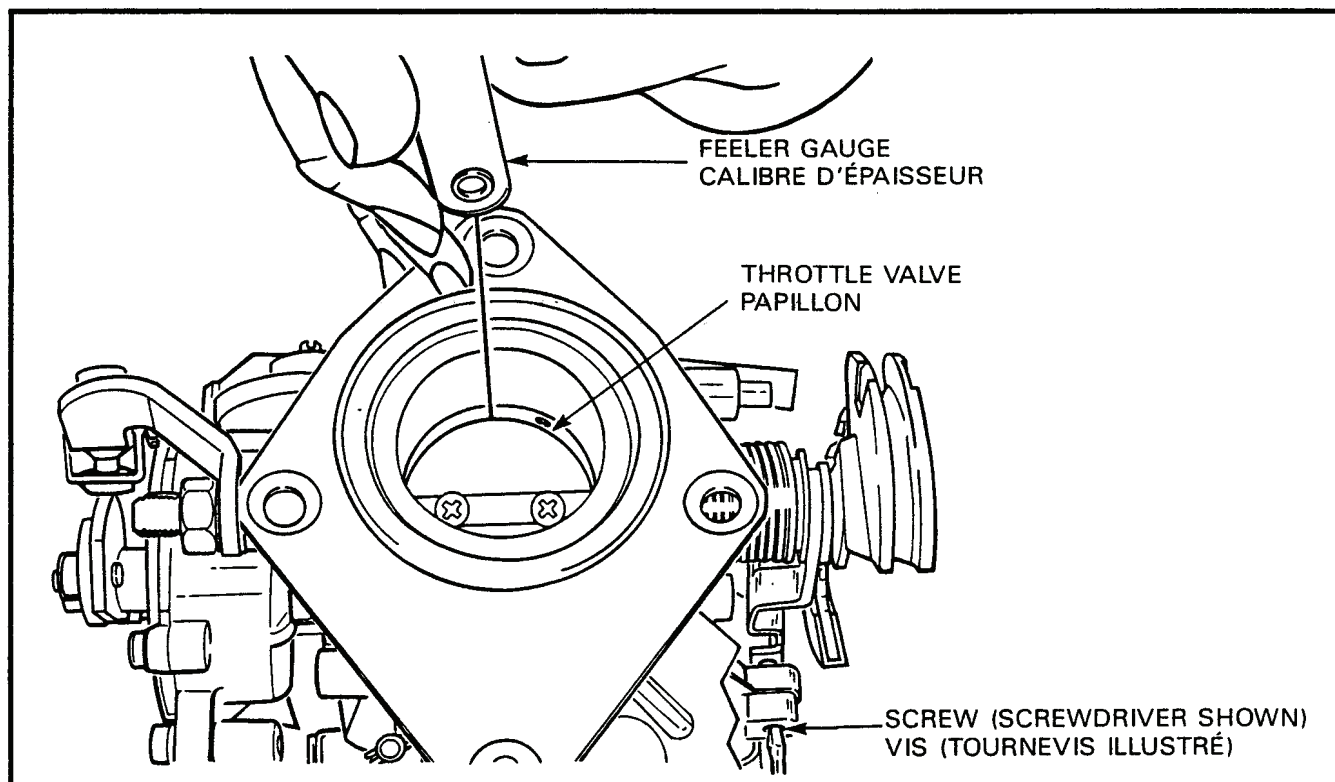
Carburetor Throttle Valve Gap Measurement
